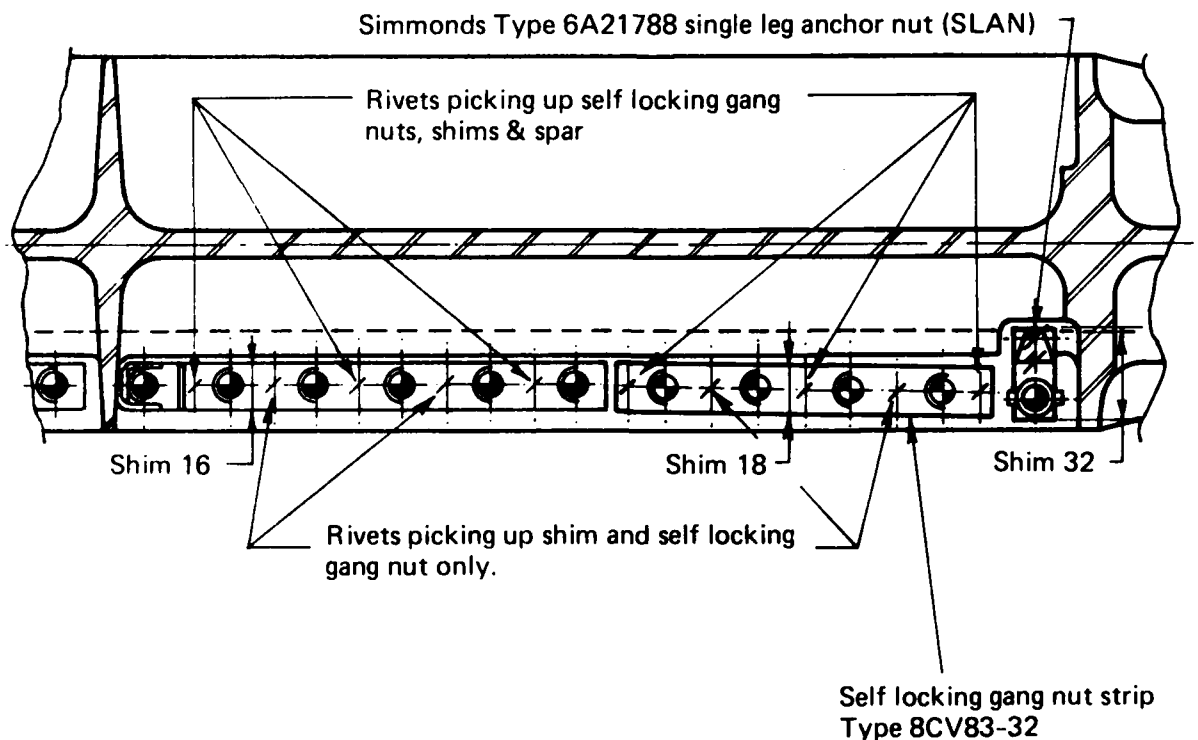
MIRAGE PORT WING VIEWED FROM LOWER SURFACE
